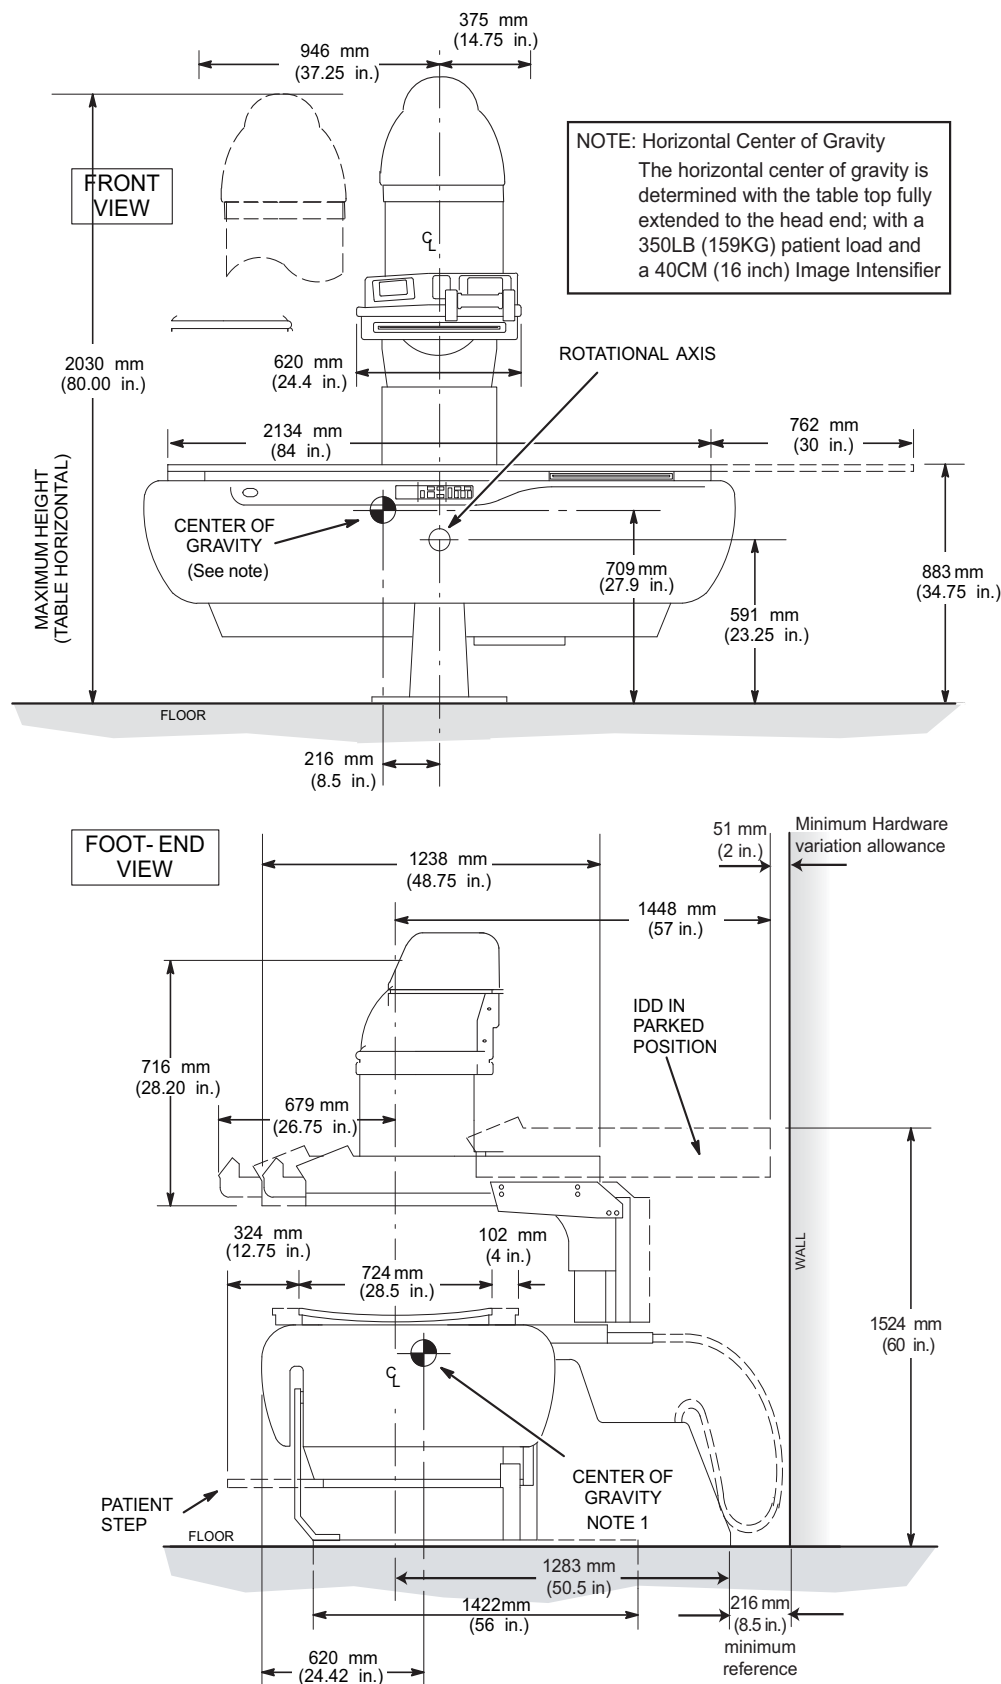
Table Dimensions (Front View and Foot-end View)
